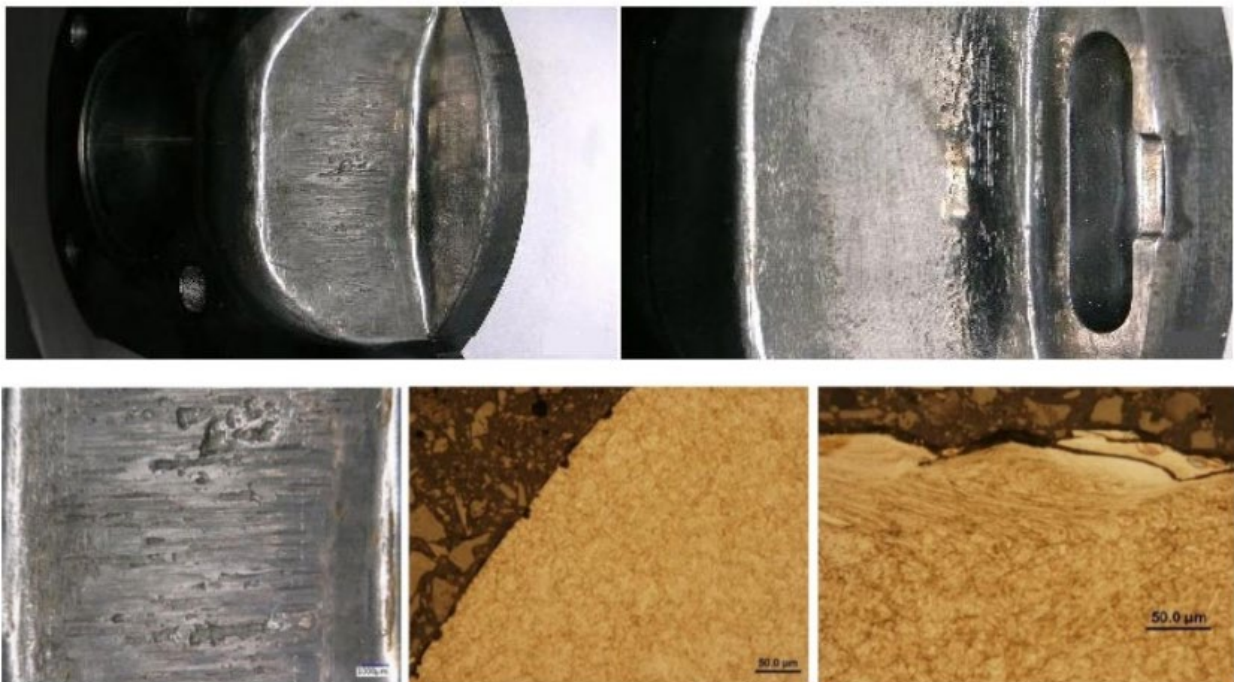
Degradation of molds during the injection of Al alloys – cracks, adhesion of the separating agent, tearing of material on the surface of the molds
